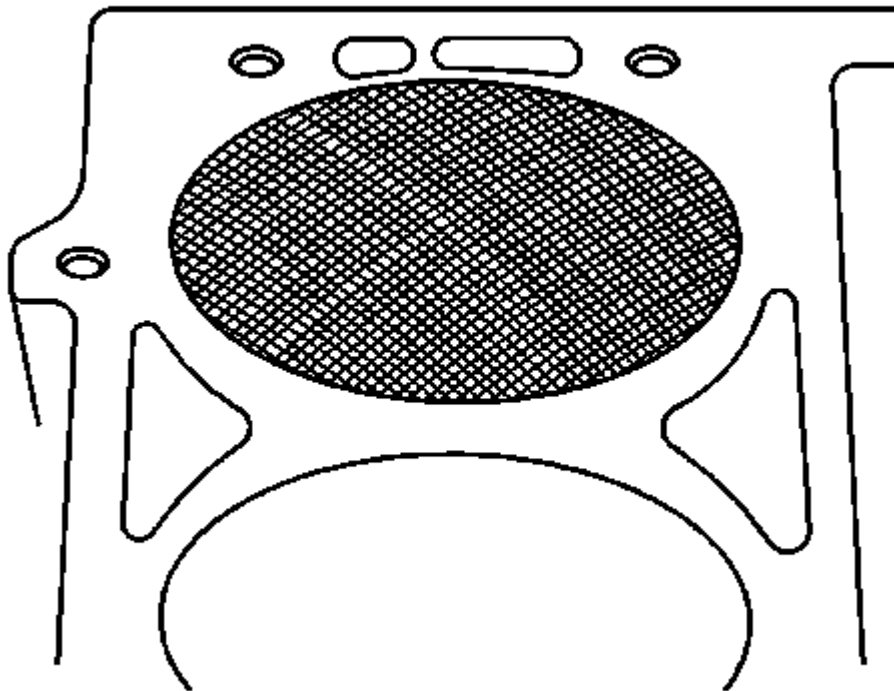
Identifying Cylinder Bore Cross Hatch Pattern
